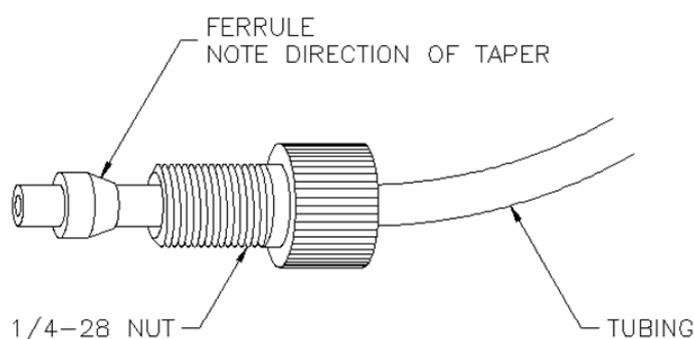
Configuration of ¼-28 Nut, Ferrule and Tubing
